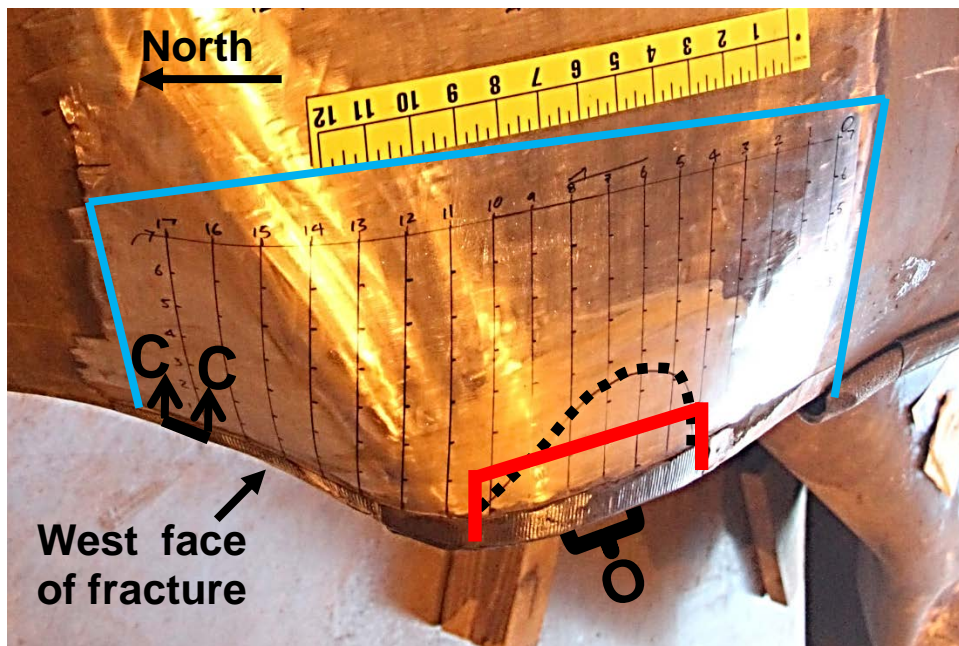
Photograph of the outer surface of the pipe at the west face of the fracture after polishing and etching followed by surface hardness testing. The origin of fracture is indicated by bracket "O". A darker etching region is located between the fracture face and the area indicated by a black dashed line. A one-inch wide portion along the fracture face was masked with tape and was not polished/etched. The 6-inch segment indicated by red lines was cut from the pipe for fracture examination.
